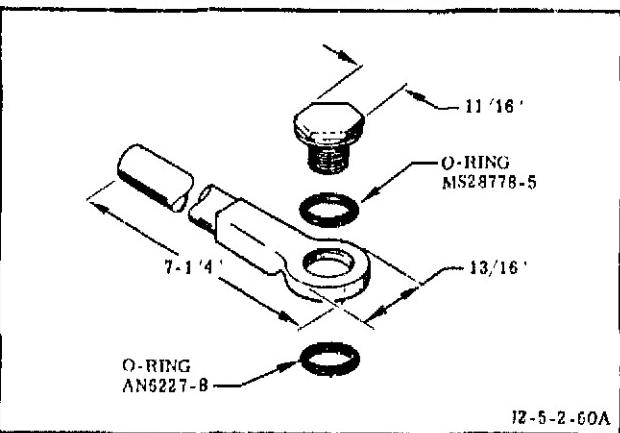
MRCV and GG Valve Drying and Leak Test Kit EWR-230094
